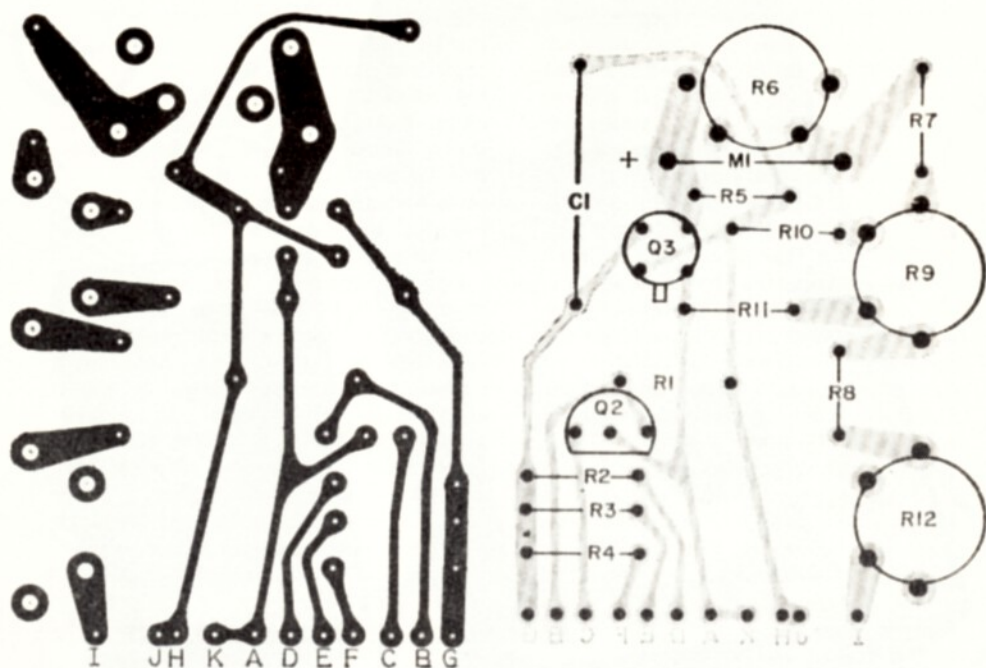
Make printed circuit board using the actual size foil pattern at left. Install components as shown at right. Board is supported directly on meter terminals and should be drilled accordingly. Alter layout if potentiometers in Parts List are not used.
